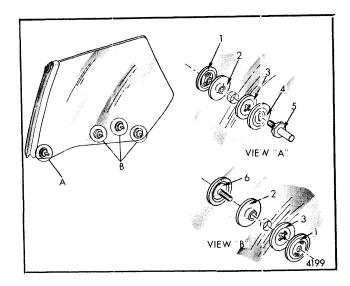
Rear Door Window Assembly - "E and C" Four Door Hardtop Styles, Except 6CB69 Styles
